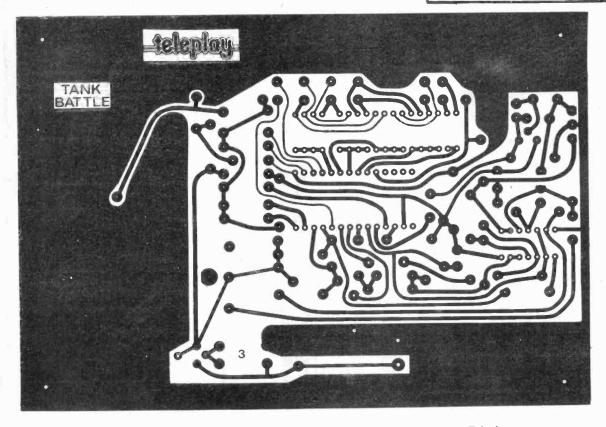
Foil pattern of the tank board. The copyright for this board is held by Teleplay who will supply the board separately as well as in a complete kit of parts.
